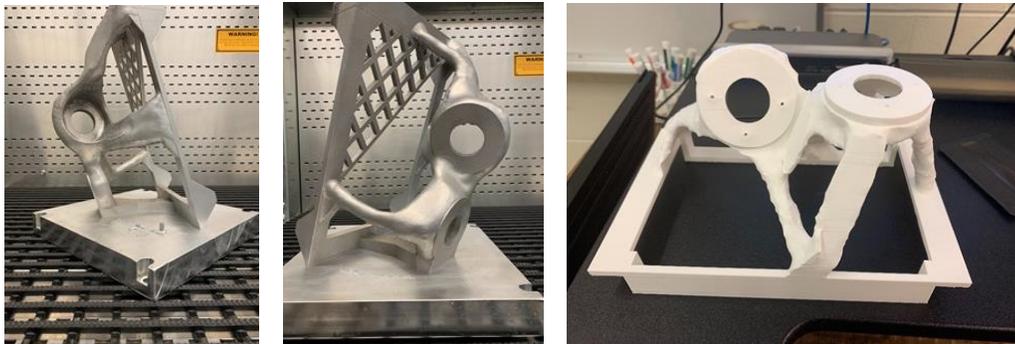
On the left and middle are final pieces printed on the M 290 with aluminum. On the right is a mount piece printed using PLA on a polymer printer.
